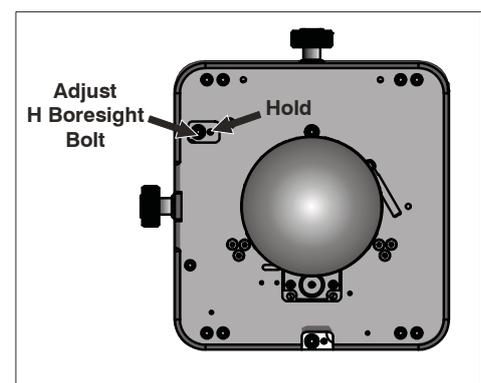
Adjust Horizontal Bore-sight Bolt
